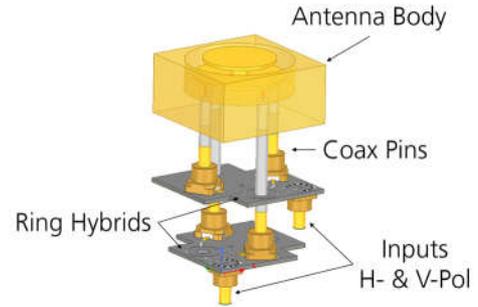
CAD drawing of the PEC antenna element, showing the element body, feeding pins and the two ring hybrids for symmetrical feeding.
